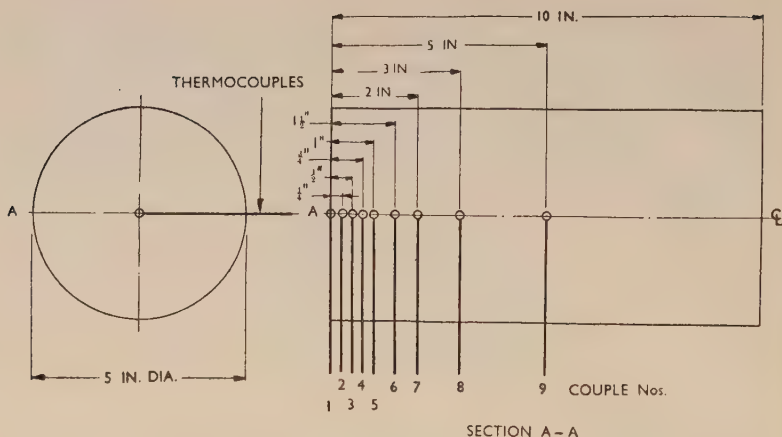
Positions of Thermocouples in Pure Aluminium Cylinder Castings.
